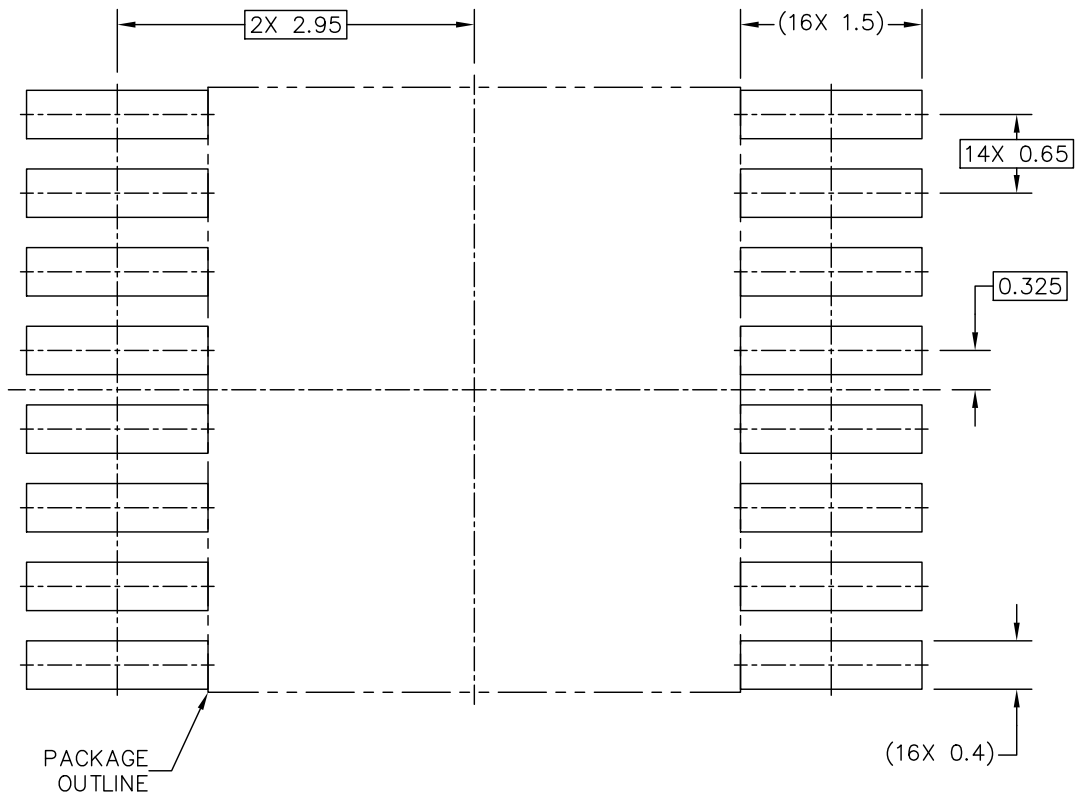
Reflow soldering footprint part1 for TSSOP16 (SOT403-1)
